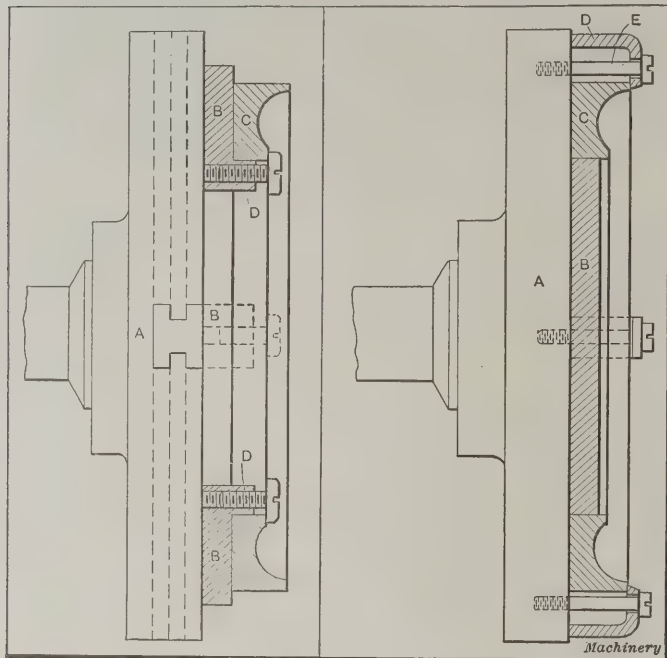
Special Chuck used for the Grinding Operation shown in Fig. 4
